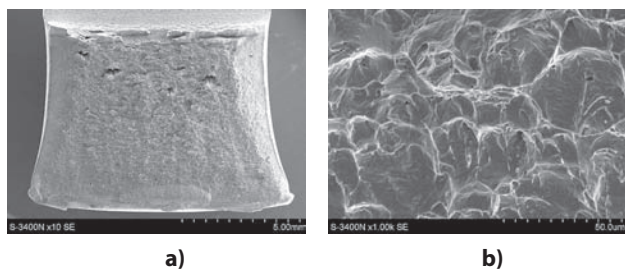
Fractures of the tested steel after the impact bending with a velocity of 30 m/s, SEM images; a) well mat surface with several microcracks; b) surface of transcrystalline ductile fractures
